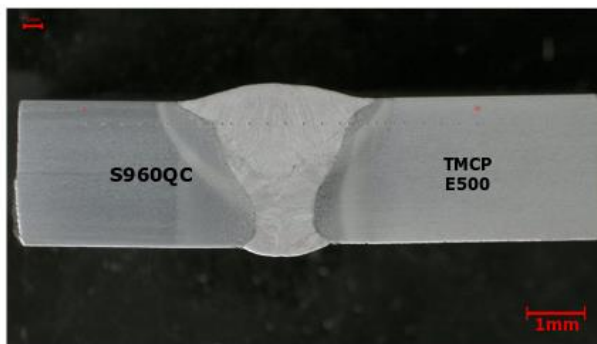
Performed cross-section of dissimilar TMCP E500 and S960QC.
